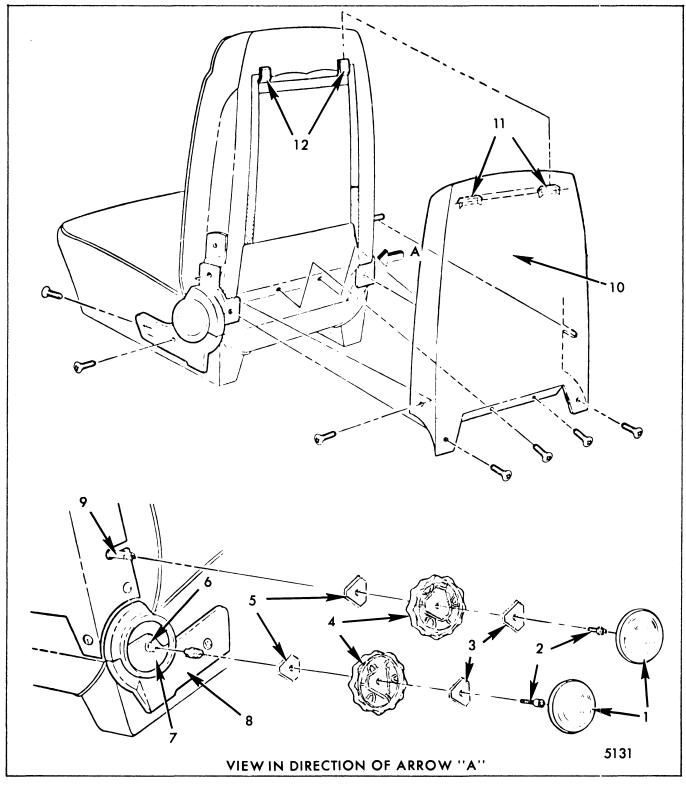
Custom Comfort Bucket Seat Back Panel, Control Knobs and Finishing Covers (Drivers Side Shown)
